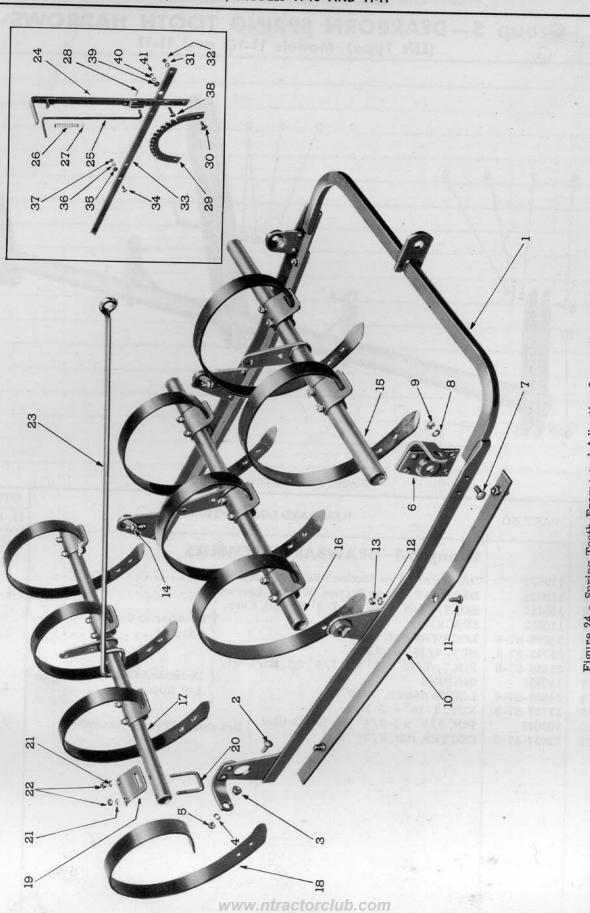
Spring Tooth Frame and Adjusting Lever Assemblies
